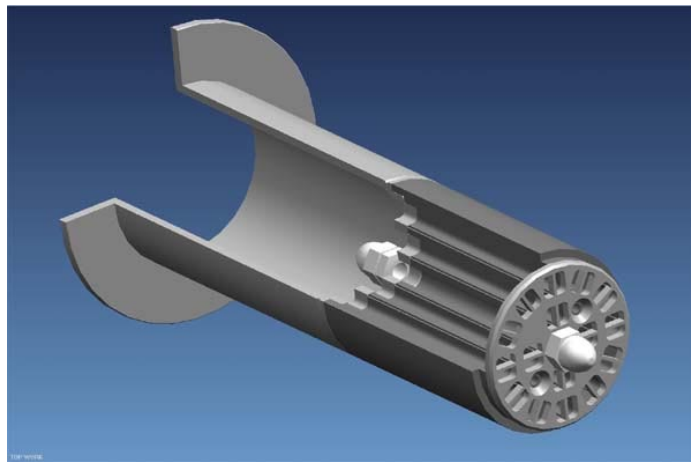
DELTA Loop corrosion test sample holder design.
